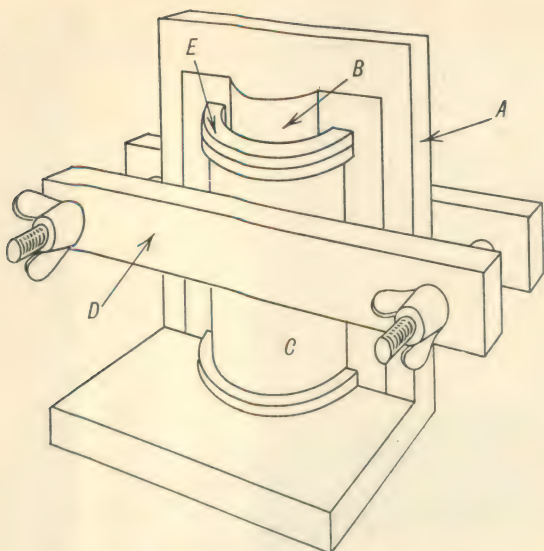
MOULD FOR HALF BEARINGS (HOYT)
